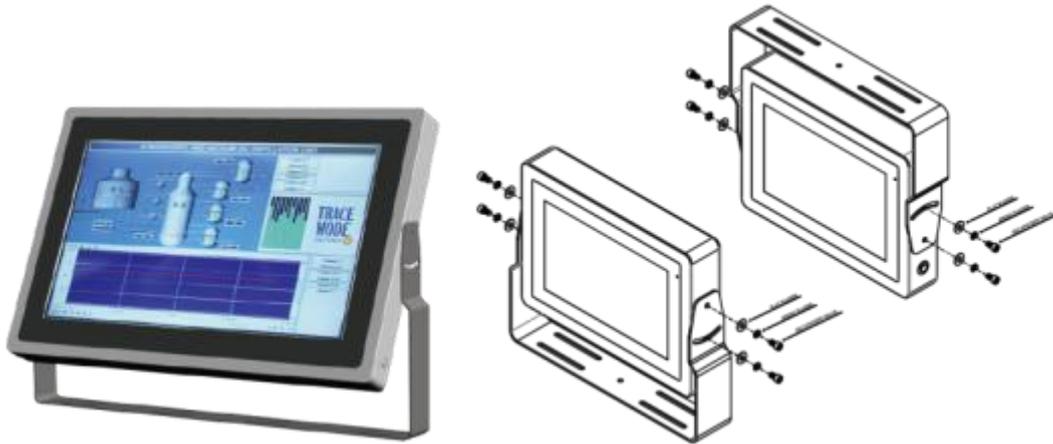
Yoke mounting of VITAM-9XXB Series
